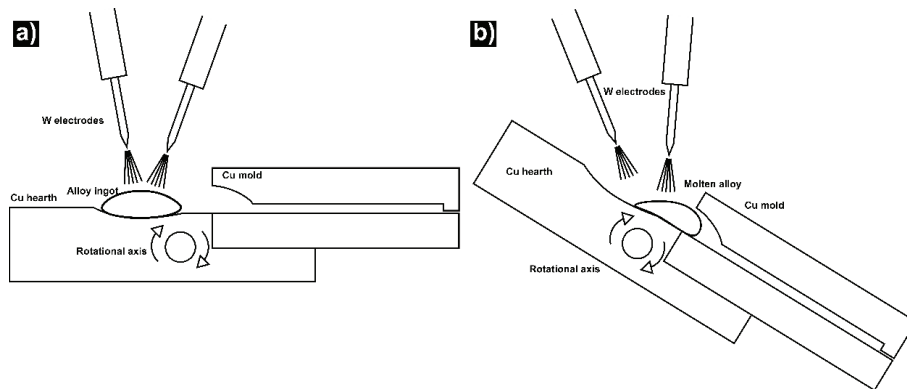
Schematic overview of the tilt casting technique, with a) showing initial heating of the alloy ingot and b) tilting of the hearth allowing the molten alloy to flow into the mold.
